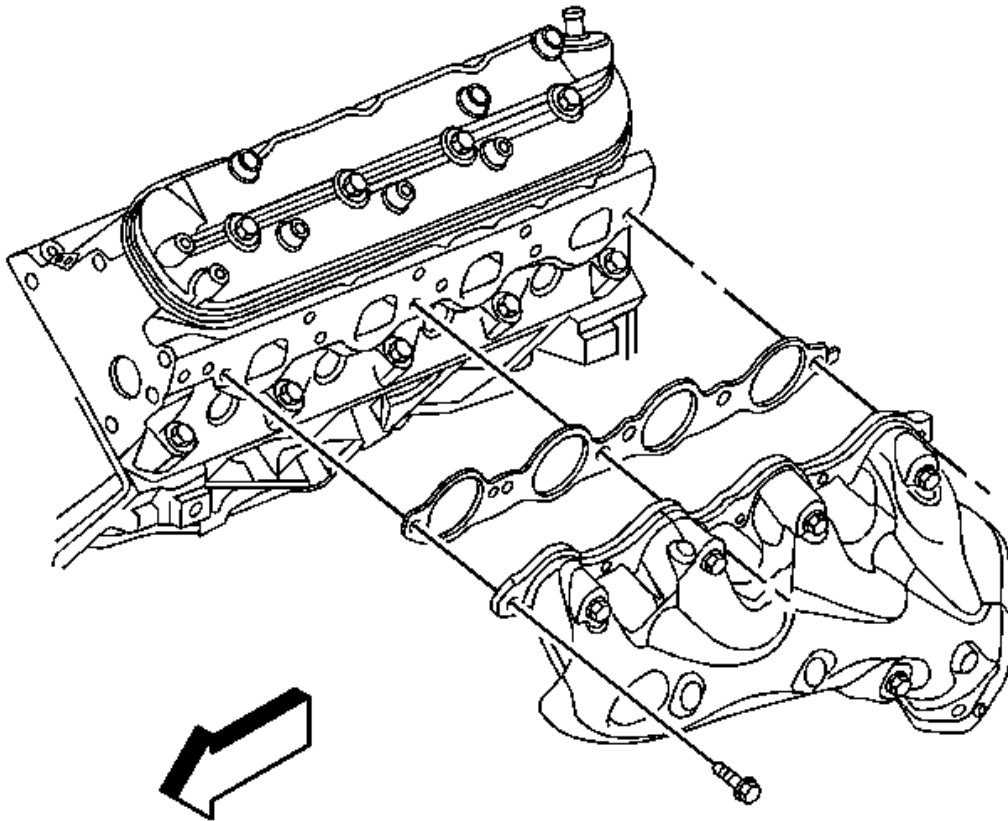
View Of Exhaust Manifold, Manifold Bolts & Gasket
